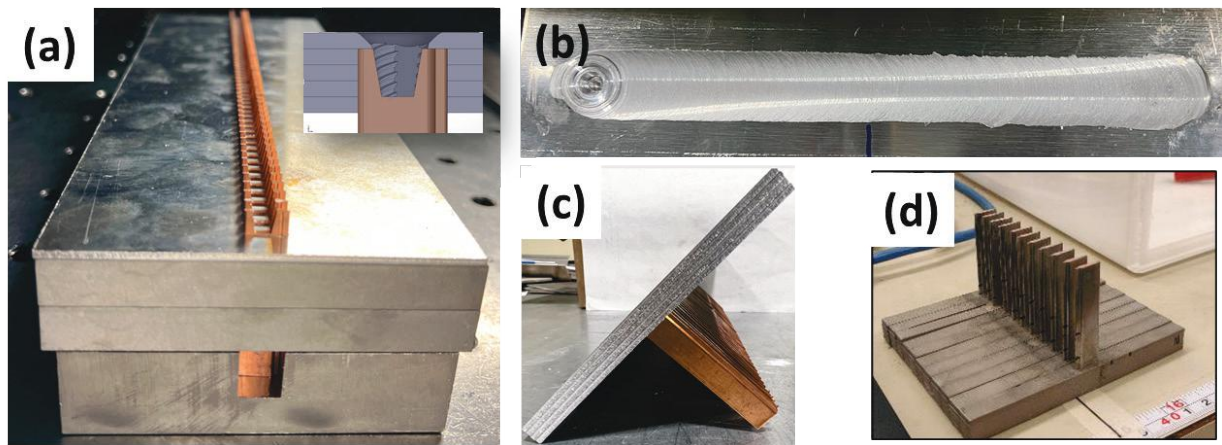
(a) Coupon stack-up assembly to join five-sheet stacks of Al to shorting bar with the backing plates (inset: schematic of five-sheet stack with grooved Cu shorting bar), (b) single-pass Al-Cu weld, (c) electro-discharge machining cut pullout specimen, and (d) the test fixture in the Instron 5582 to pullout these cut specimen. Source: PNNL.
